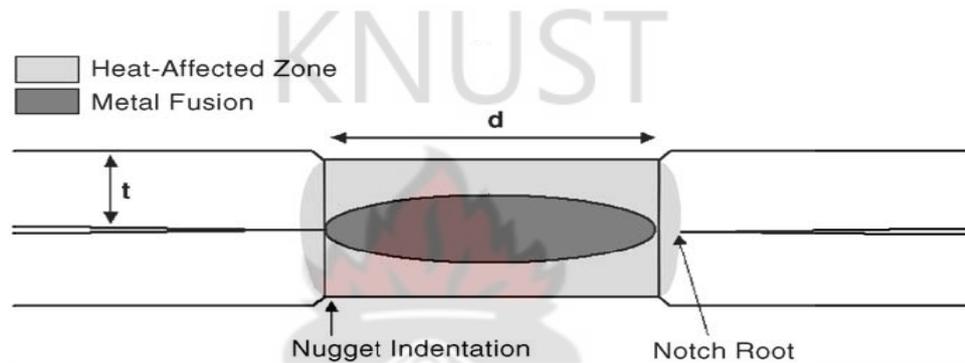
Spot weld layout and dimensions. (Donders et al, 2006)
